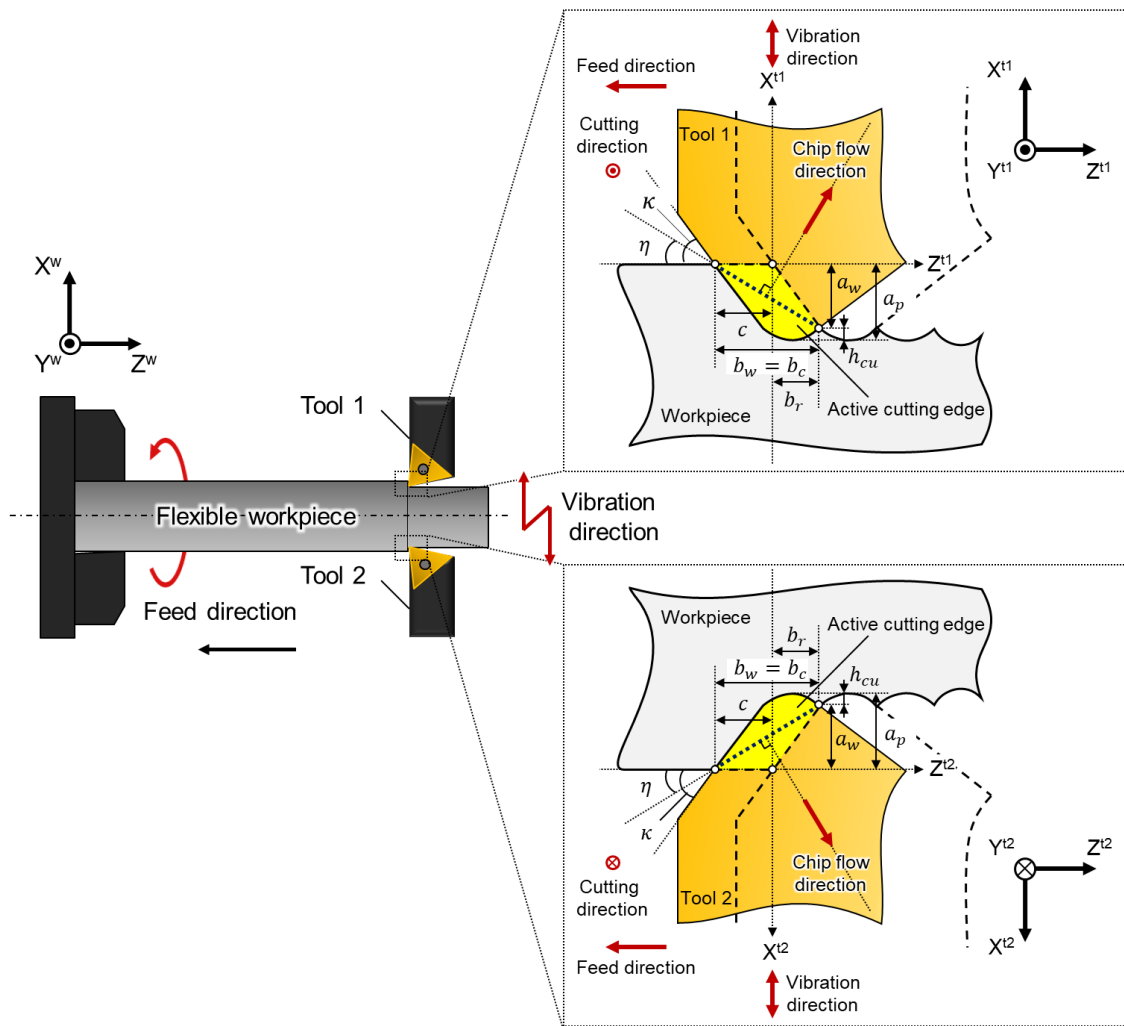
Schematic of shared-surface parallel turning with flexible workpiece
